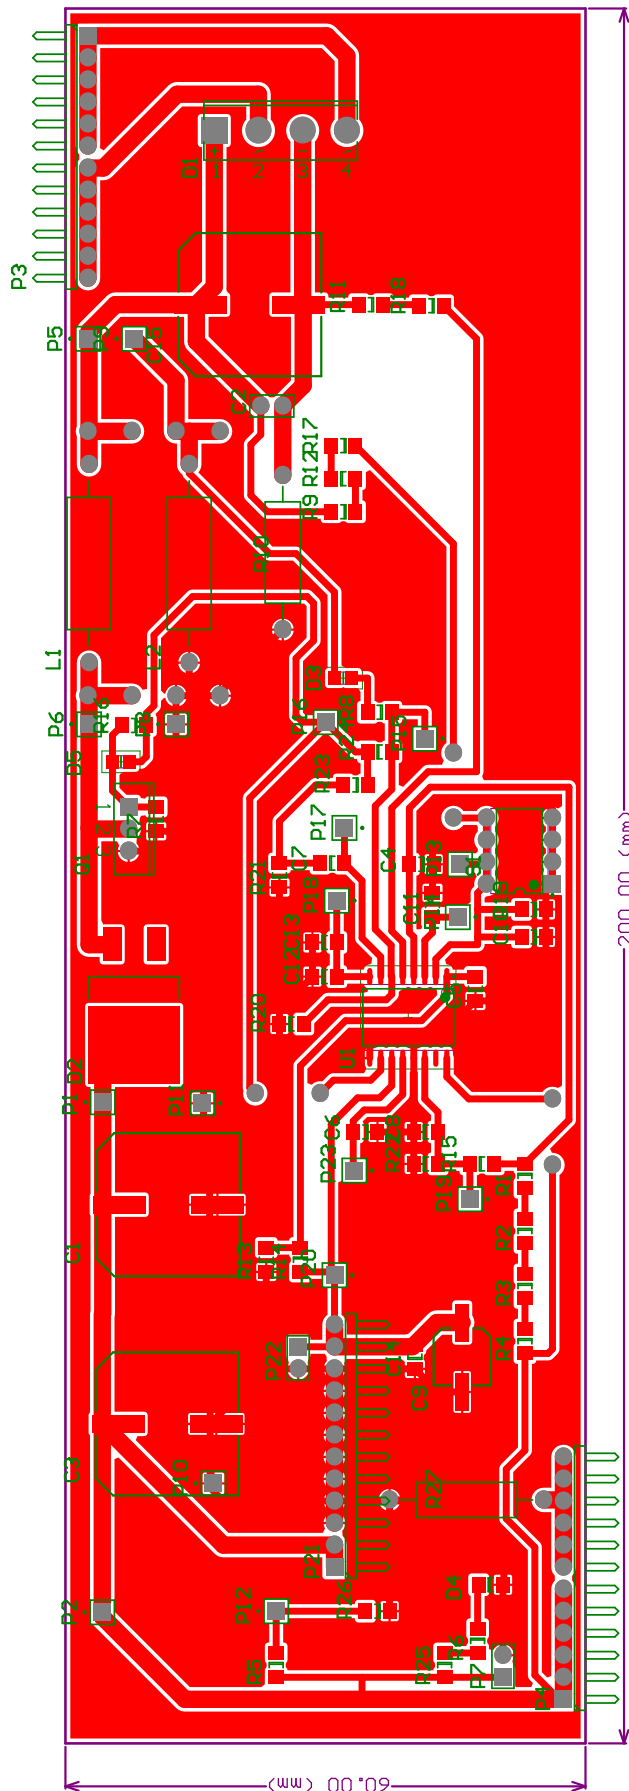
Boost converter module printed circuit board (PCB) layout.
